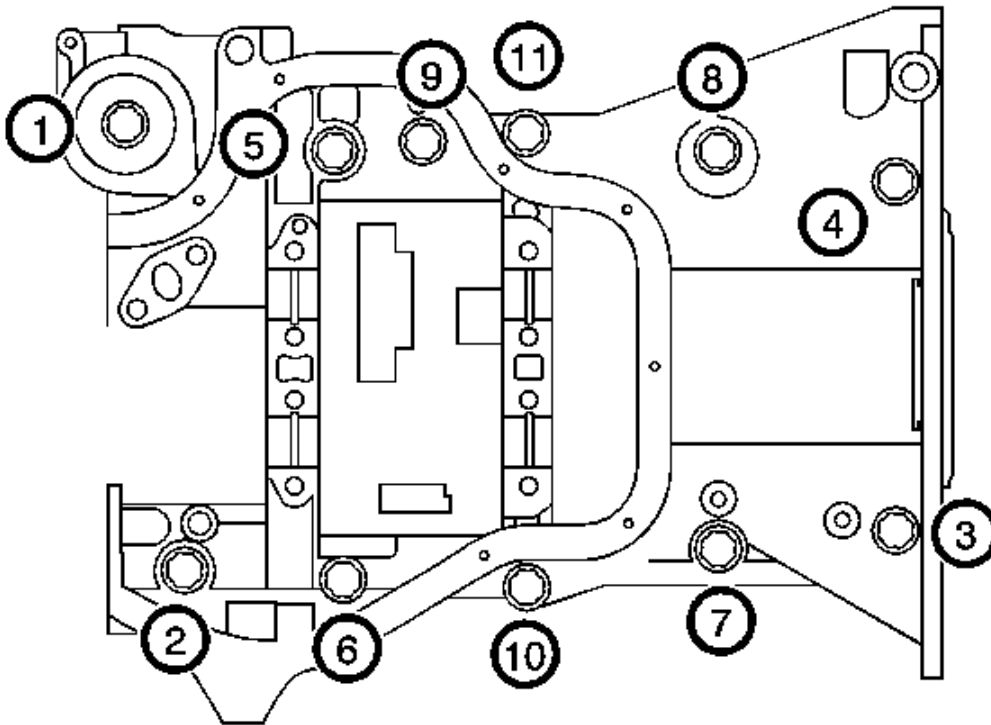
Identifying Lower Crankcase Bolt Loosening Sequence
